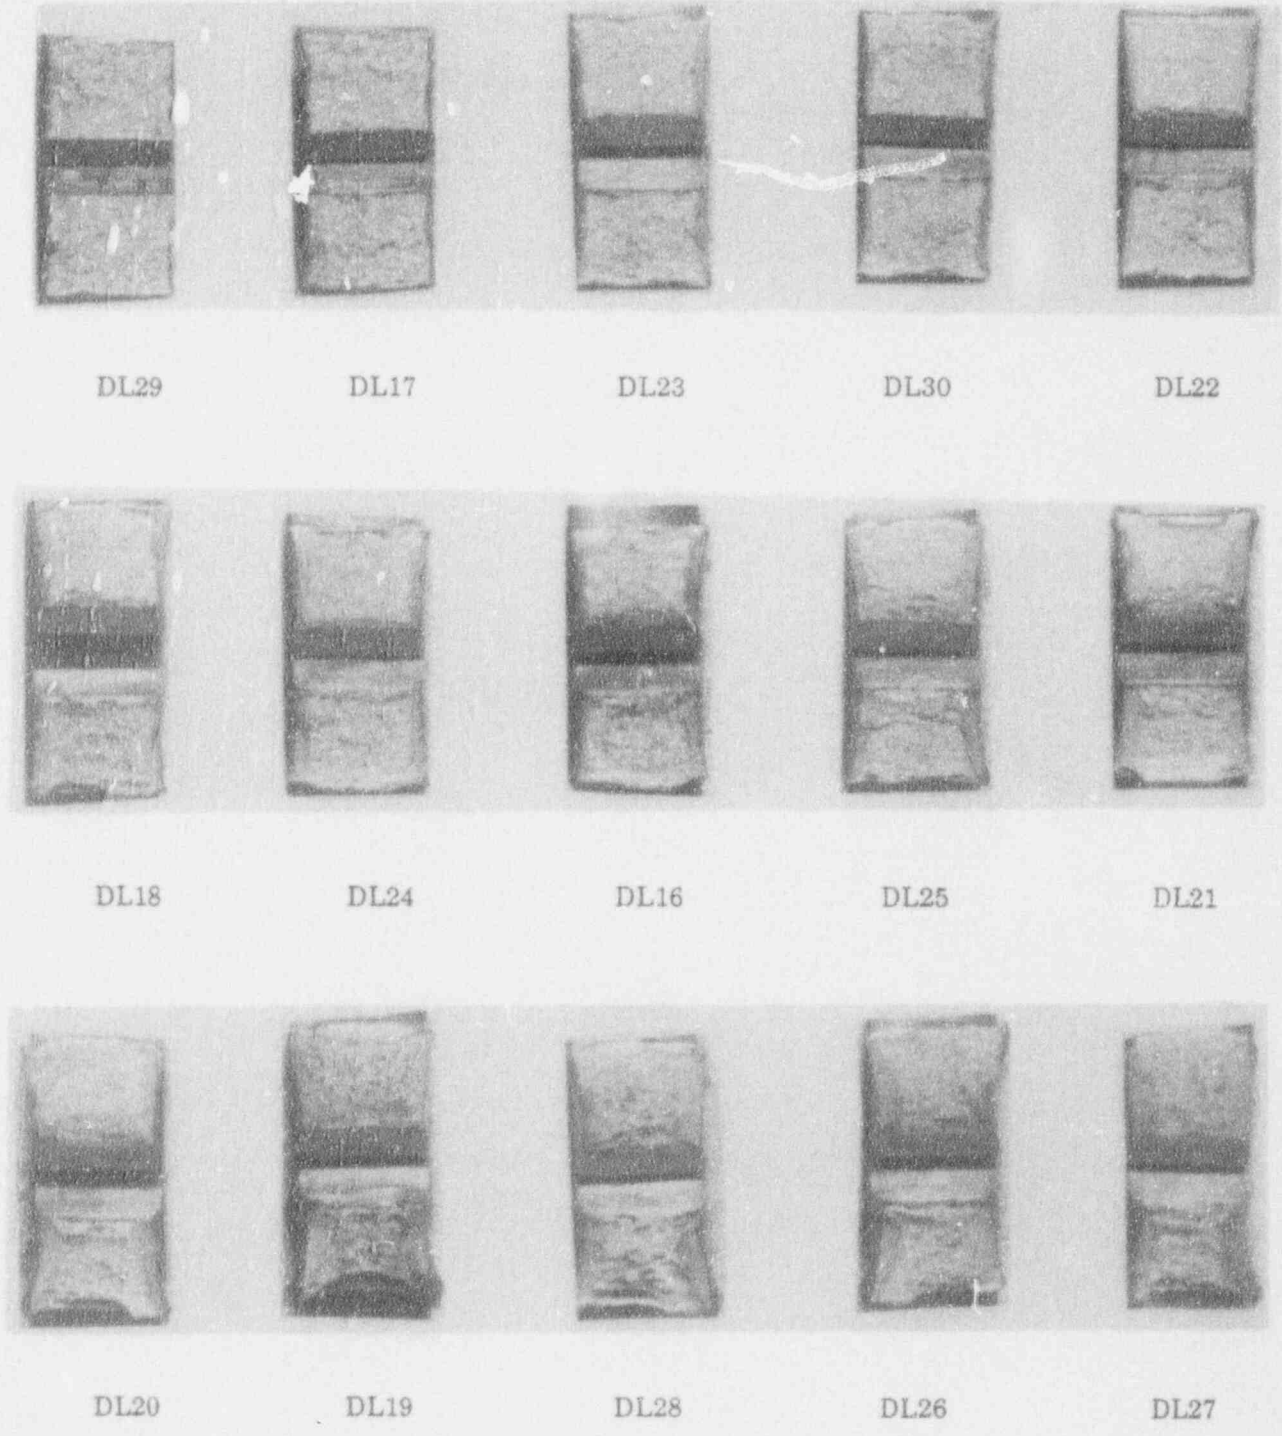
Charpy Impact Specimen Fracture Surfaces for McGuire Unit 1 Reactor Vessel Intermediate Shell Plate B5012-1 (Longitudinal Orientation)
